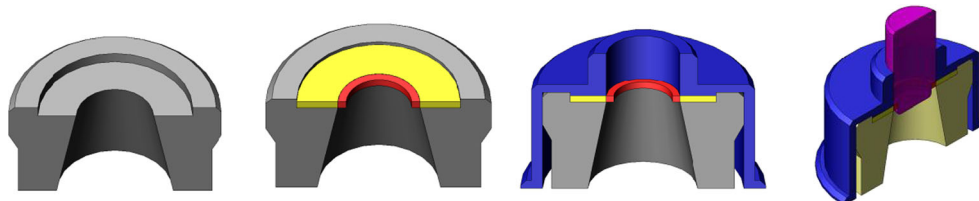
Apparatus for the shear testing of the clad tube bonding strength
